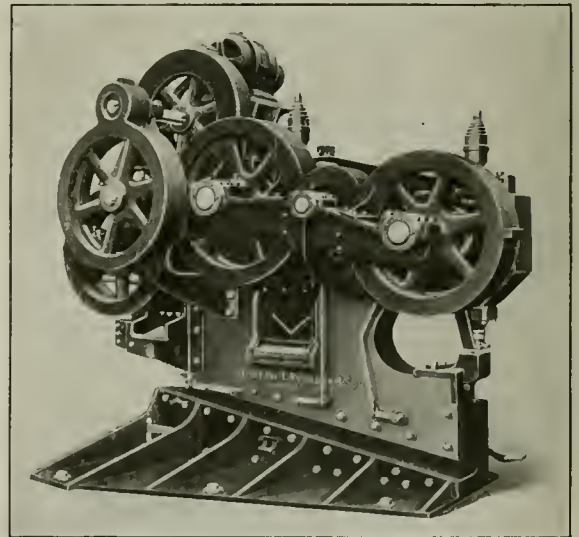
Back View Showing Arrangement of Overhanging Machine Parts.
